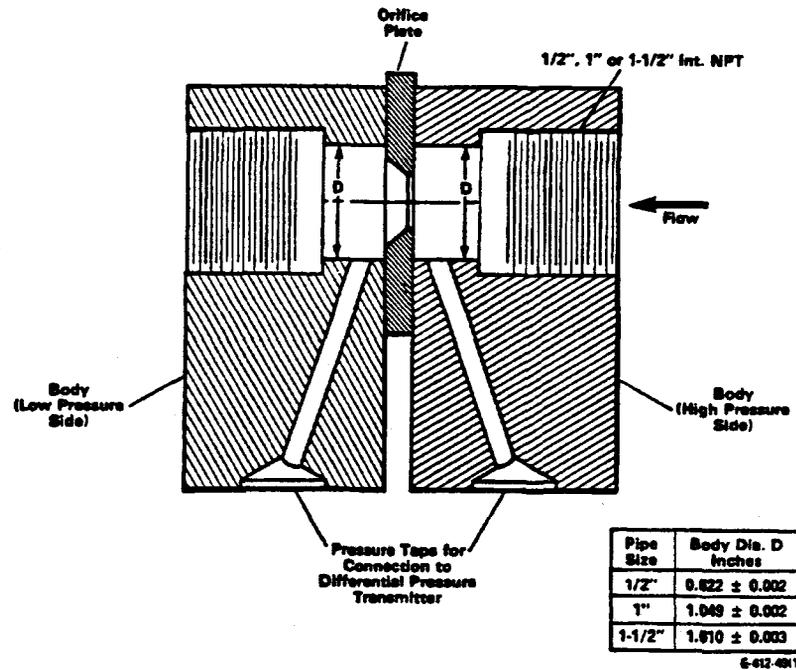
Cross-Section View of Flow Element With Threaded Connections
